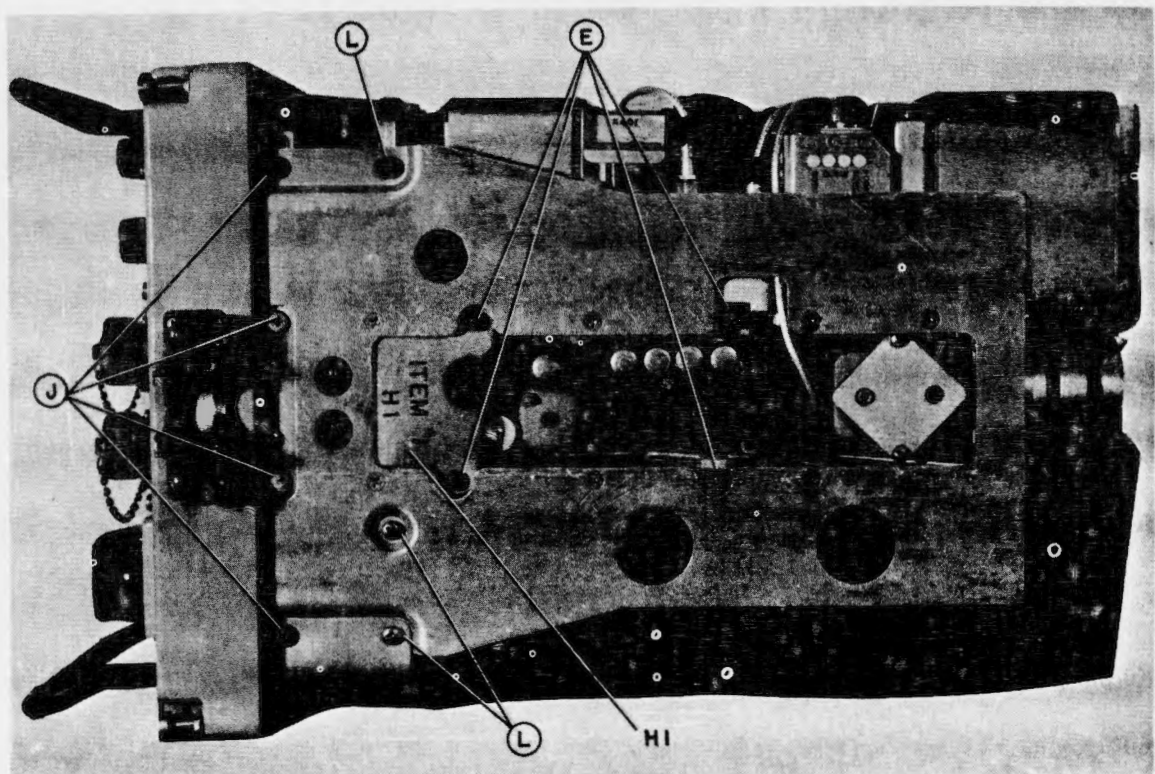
Receiver-Transmitter RT-581( )/URC-9, Bottom View, Subassembly Removal
